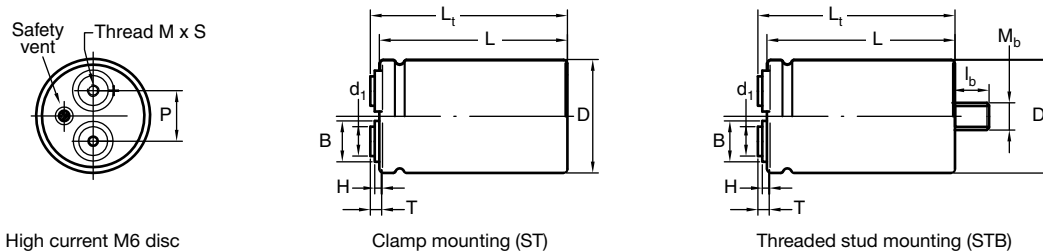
B - Mechanical drawings for high current M6 disc versions.
